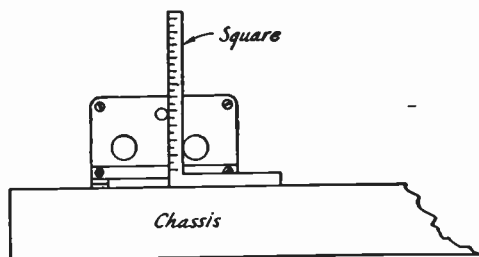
Method of measuring heights of shafts. If the square is adjustable, the end of the scale should be set flush with the face of the head.
